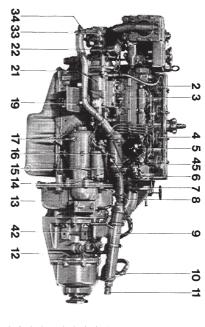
Port side, MD 21 A with Borg-Warner reverse gear
